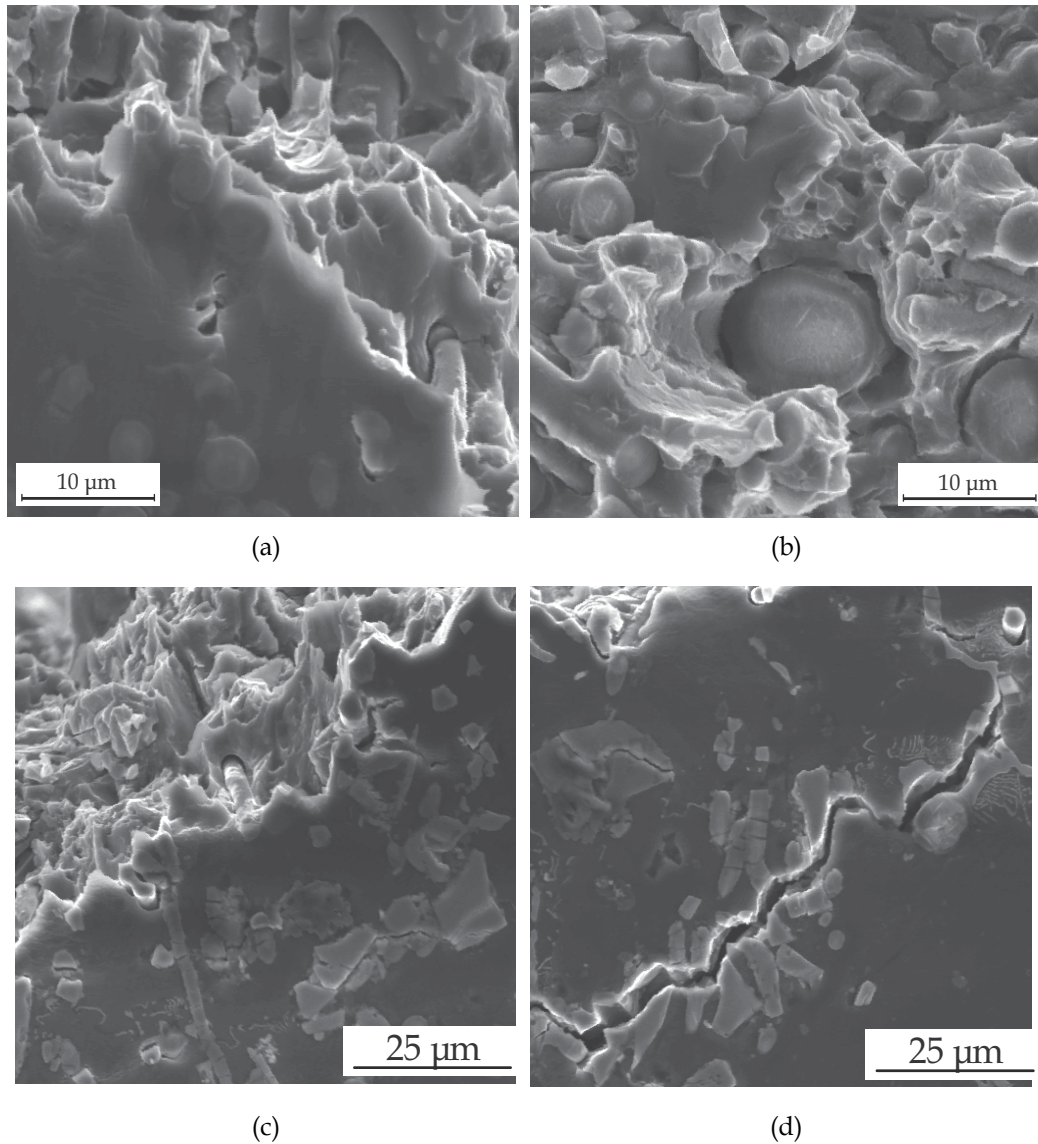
Dimple morphology of the fracture surface of AZ91f sample (a) and fine dimples observed after bending at 100 °C (b). The crack formation in AZ91h sample (c). Reinforcing particles and fibres are the preferential places for the crack formation (d).
